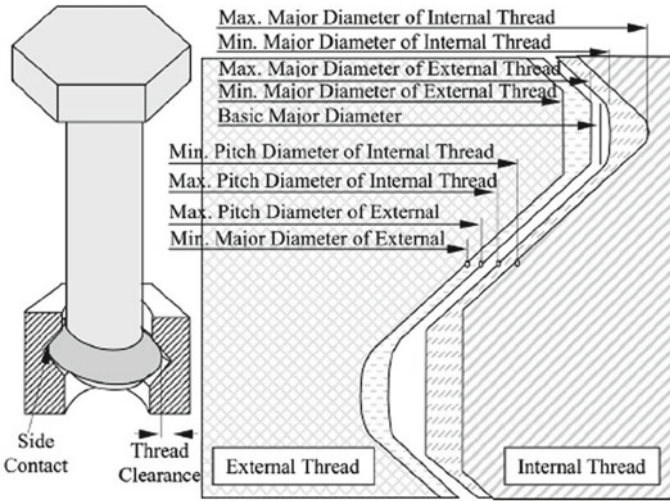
Schematic of the thread clearance between engaged bolt and nut threads
